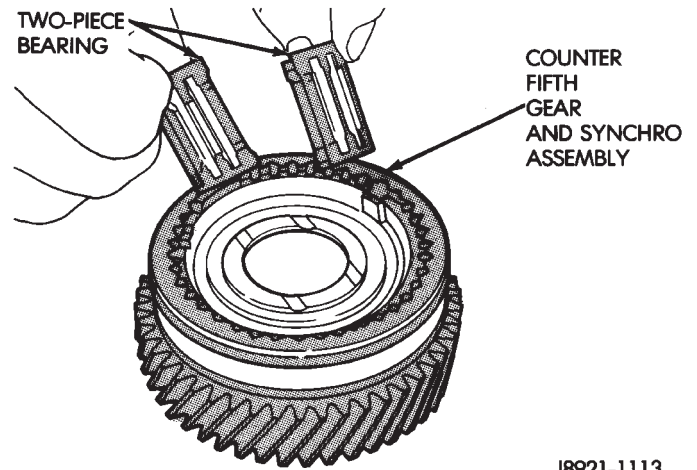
Assembling Fifth Gear And Synchro Assembly
